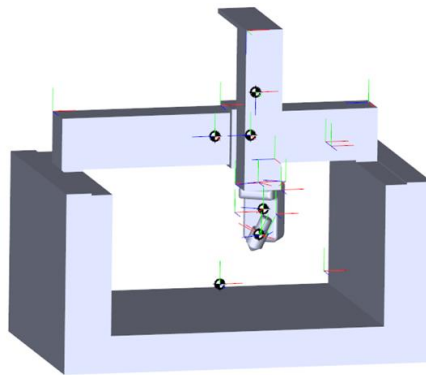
Five-axis CNC machine tool in SimMechanics
